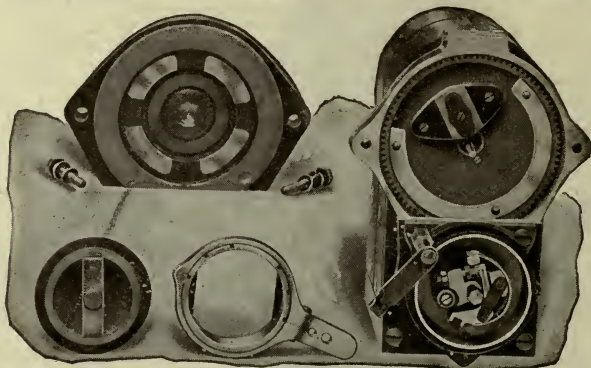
View with distributor plate and interrupter housing removed showing distributor segments, distributor brush, interrupter, etc.
